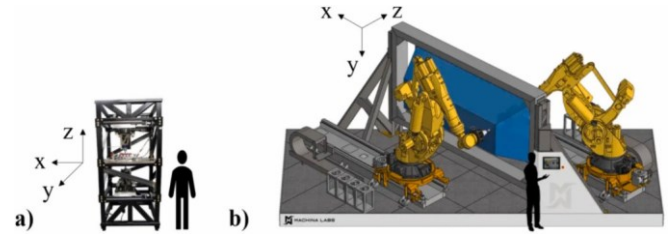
Configurations for two machines with human-scale. (a) CNC system DSIF machine at Northwestern [21] – machine 1; (b) Robotic manufacturing DSIF system at Machina Labs [22] – machine 2. Coordinates x and y denote the surface plane of metal sheet, while z denotes axial direction of the forming tools.
